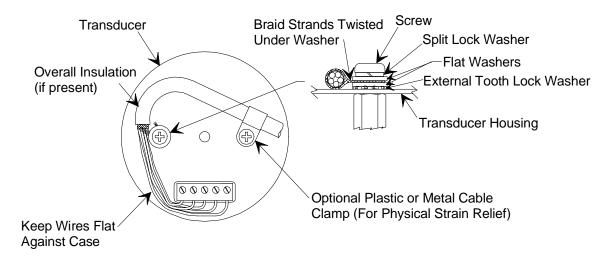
Alternate Method To Connect an Overall Metal Braided Shielded Cable
